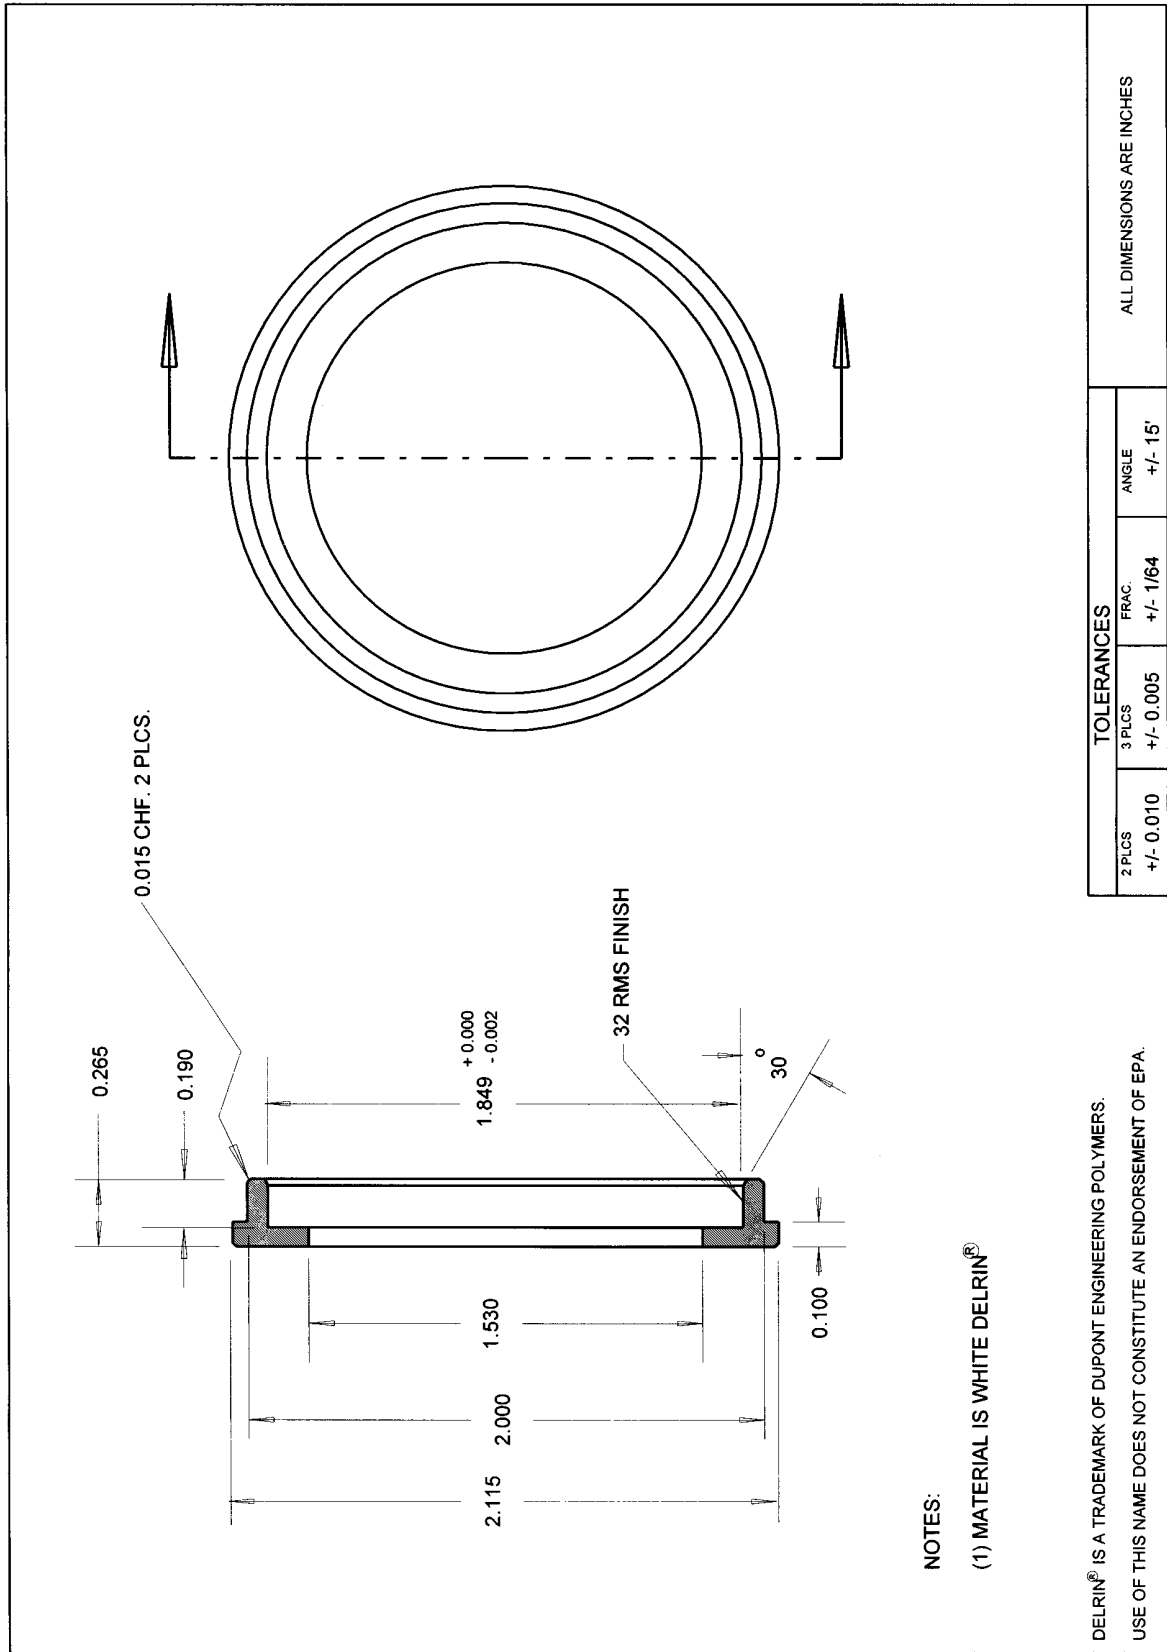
FILTER CASSETTE, LOWER SECTION
